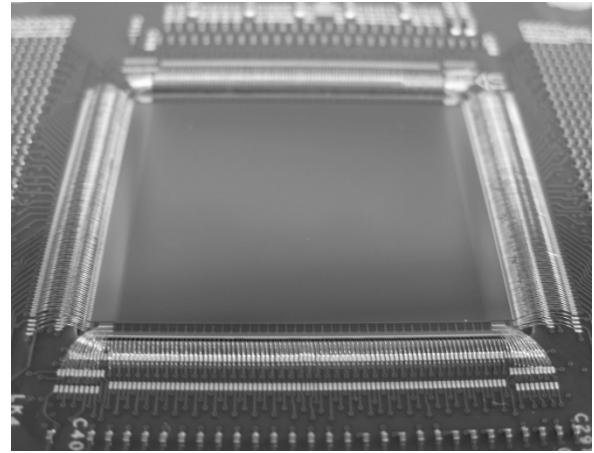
Photograph of Kirana sensor mounted on printed circuit board
